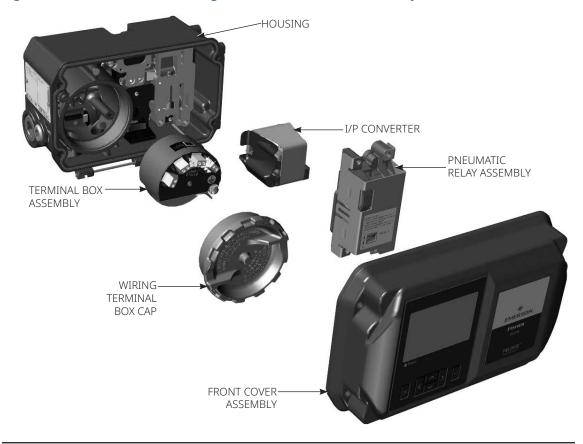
FIELDVUE DVC7K Digital Valve Controller Assembly
